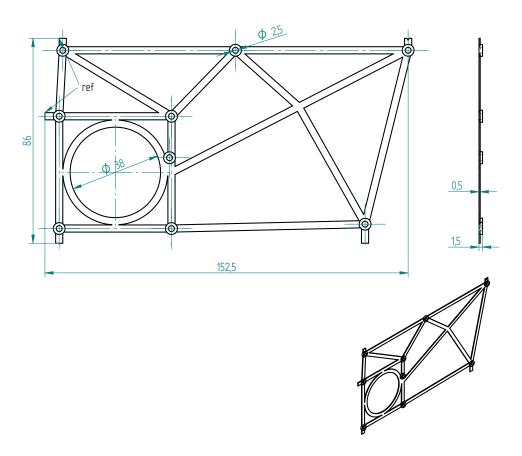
Drawing of the  $\mathbf{drillator-m}$
